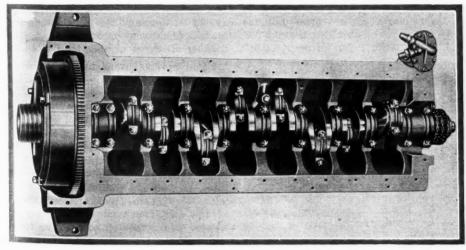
Interior of crankcase which contains only crankshaft and reciprocating assemblies. Also shows clutch and oil pump.
